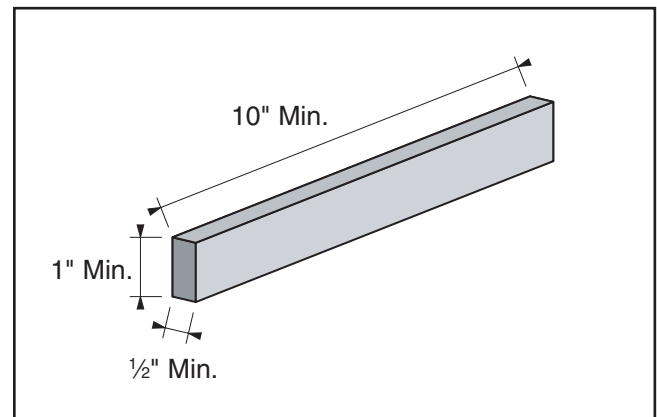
Illustration showing the minimum workpiece dimensions for edge jointing.
